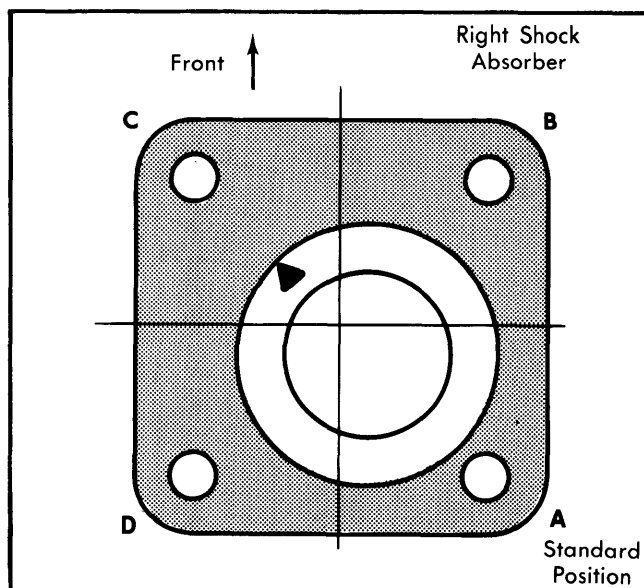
RX7 & 626 Caster and Camber Adjusting Pad (Position "C" Shown)
